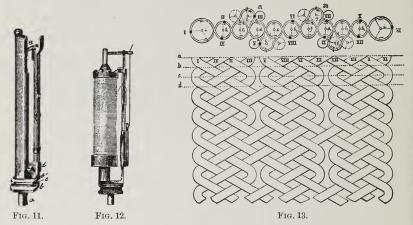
Vertical bobbin holder. Fig. 12.—Bobbin carrier, showing the outside tension weight. Fig. 13.—Courses of bobbins in making three-line lace.
